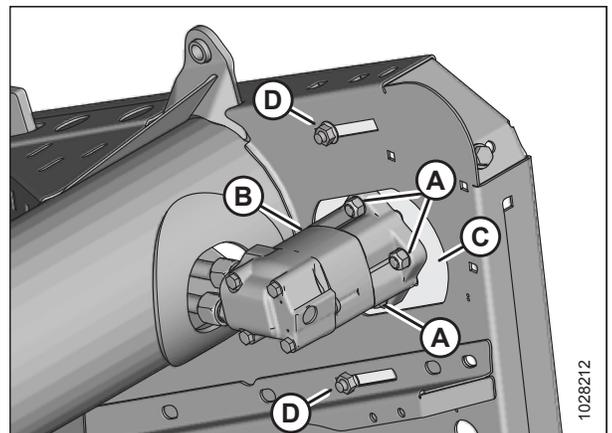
Knife Drive Motor – Double-Knife Header View from Rear
